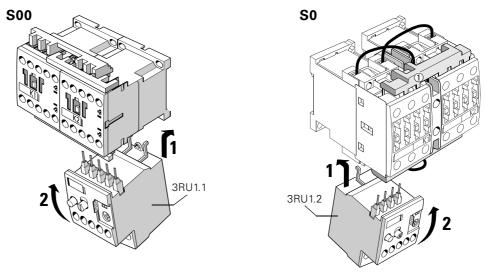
Fully assembled contactor combination for reversing (frame sizes S00 and S0)
